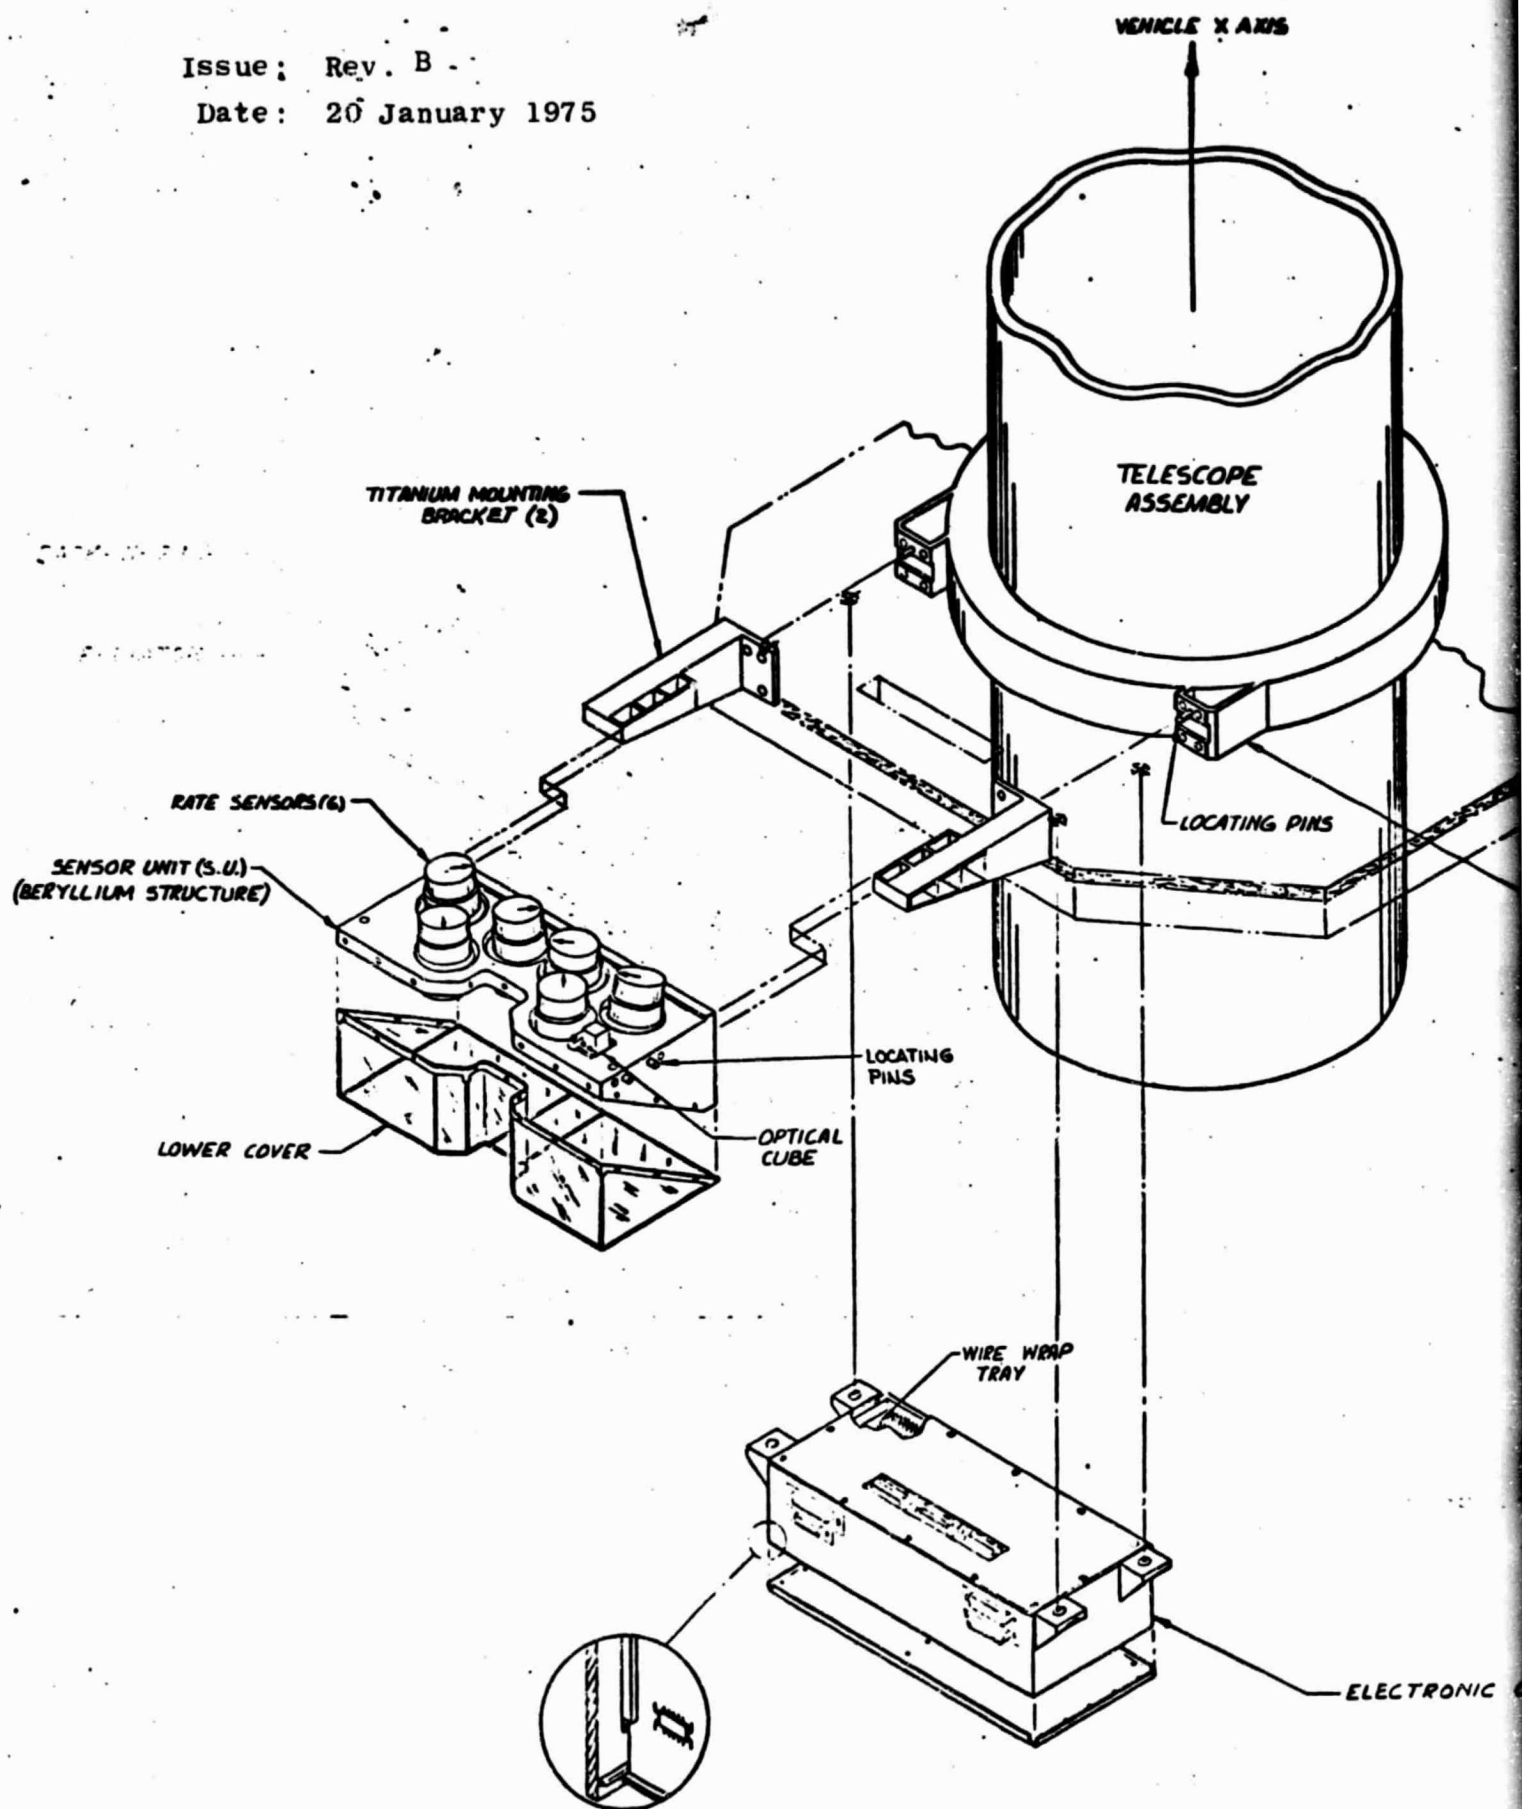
shows an exploded view of the IRA units illustrating the mounting arrangement to the telescope strong ring and honeycomb structure. The Sensor Unit mounts to the strong ring in a cantilever manner. A titanium mounting strut is used for strength and proper thermal characteristics. The lower cover of the Sensor Unit is an aluminum frame with aluminized mylar skin.
